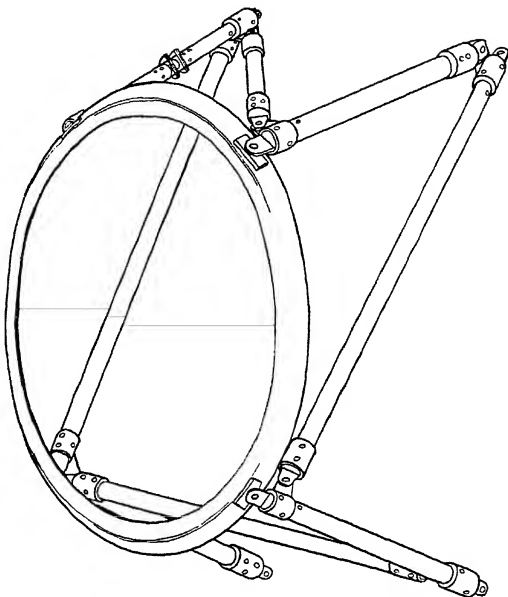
ENGINE MOUNTING STRUCTURE.
